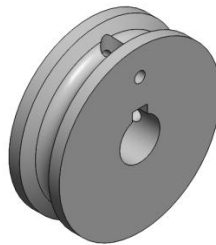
Redesigned CAD of the pulley with a hole to hold the fishing line.
